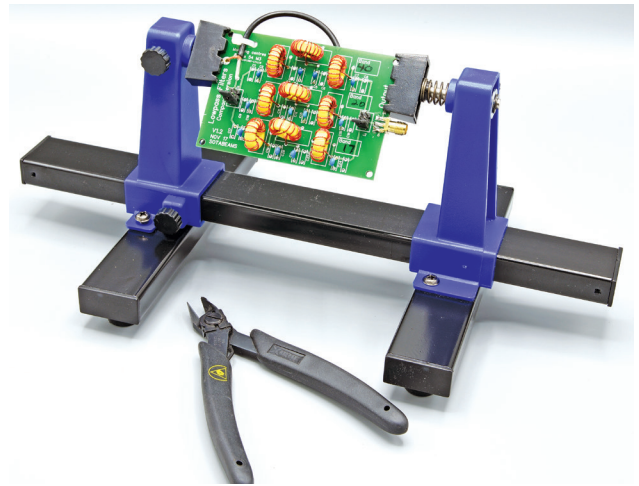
The Aven Adjustable Circuit Board Holder resembles a lathe. The PC board is easily rotated.
